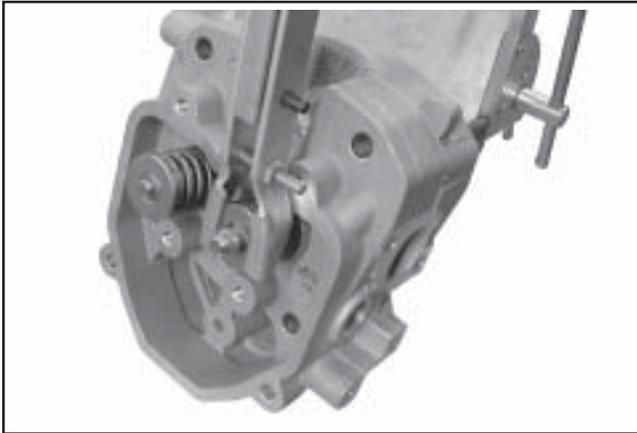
Assembling Valves with a Valve Spring Compressor.
